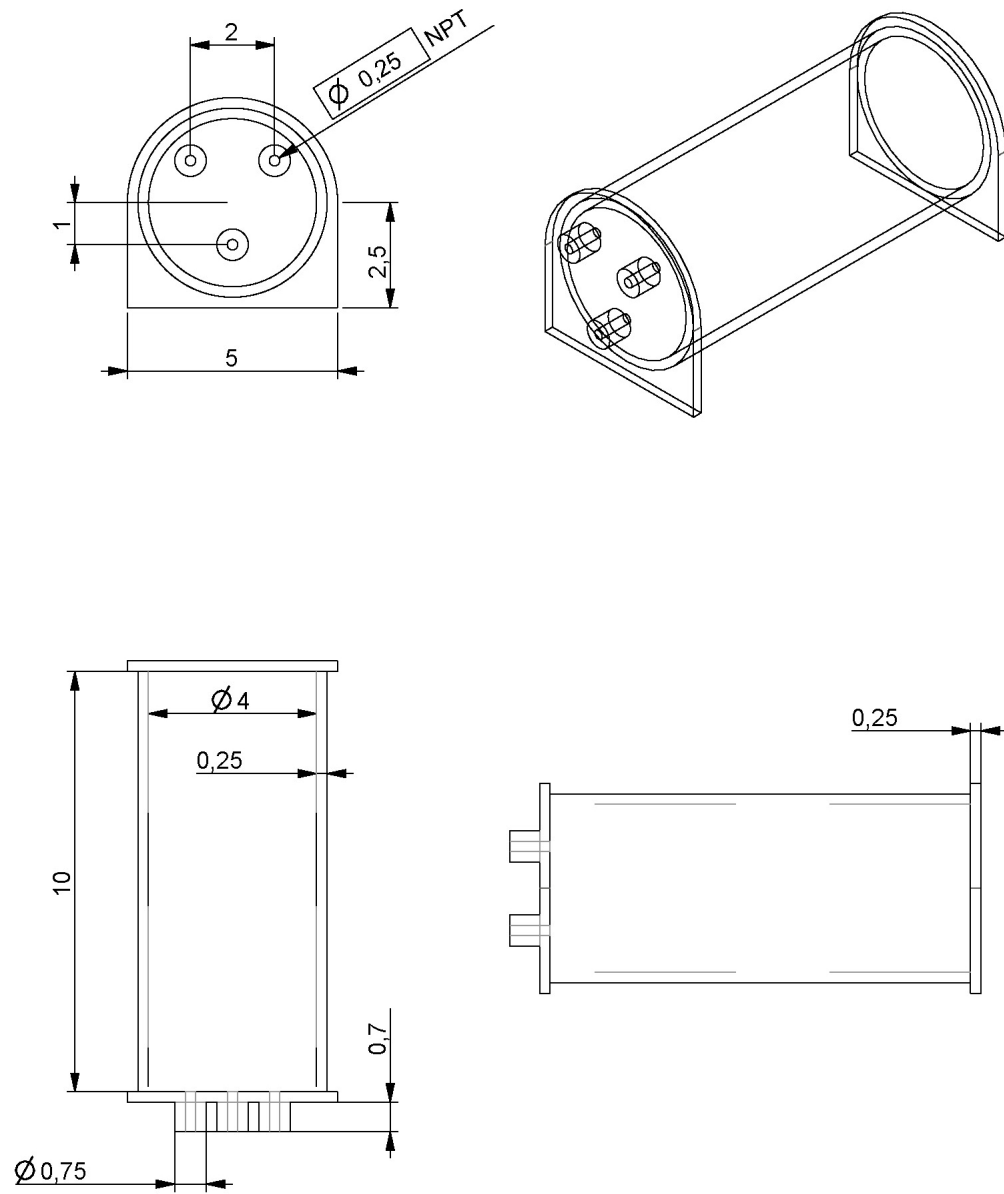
Technical drawing of the vacuum chamber used for pressure transducer calibration. All dimensions are in inches. Material Aluminum.
